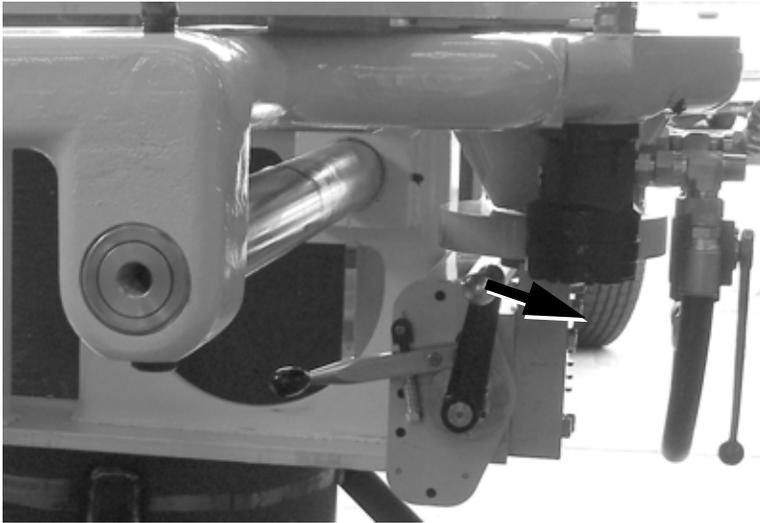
If necessary, turn the feed handle clockwise to retract the saw bow before mounting the saw.
